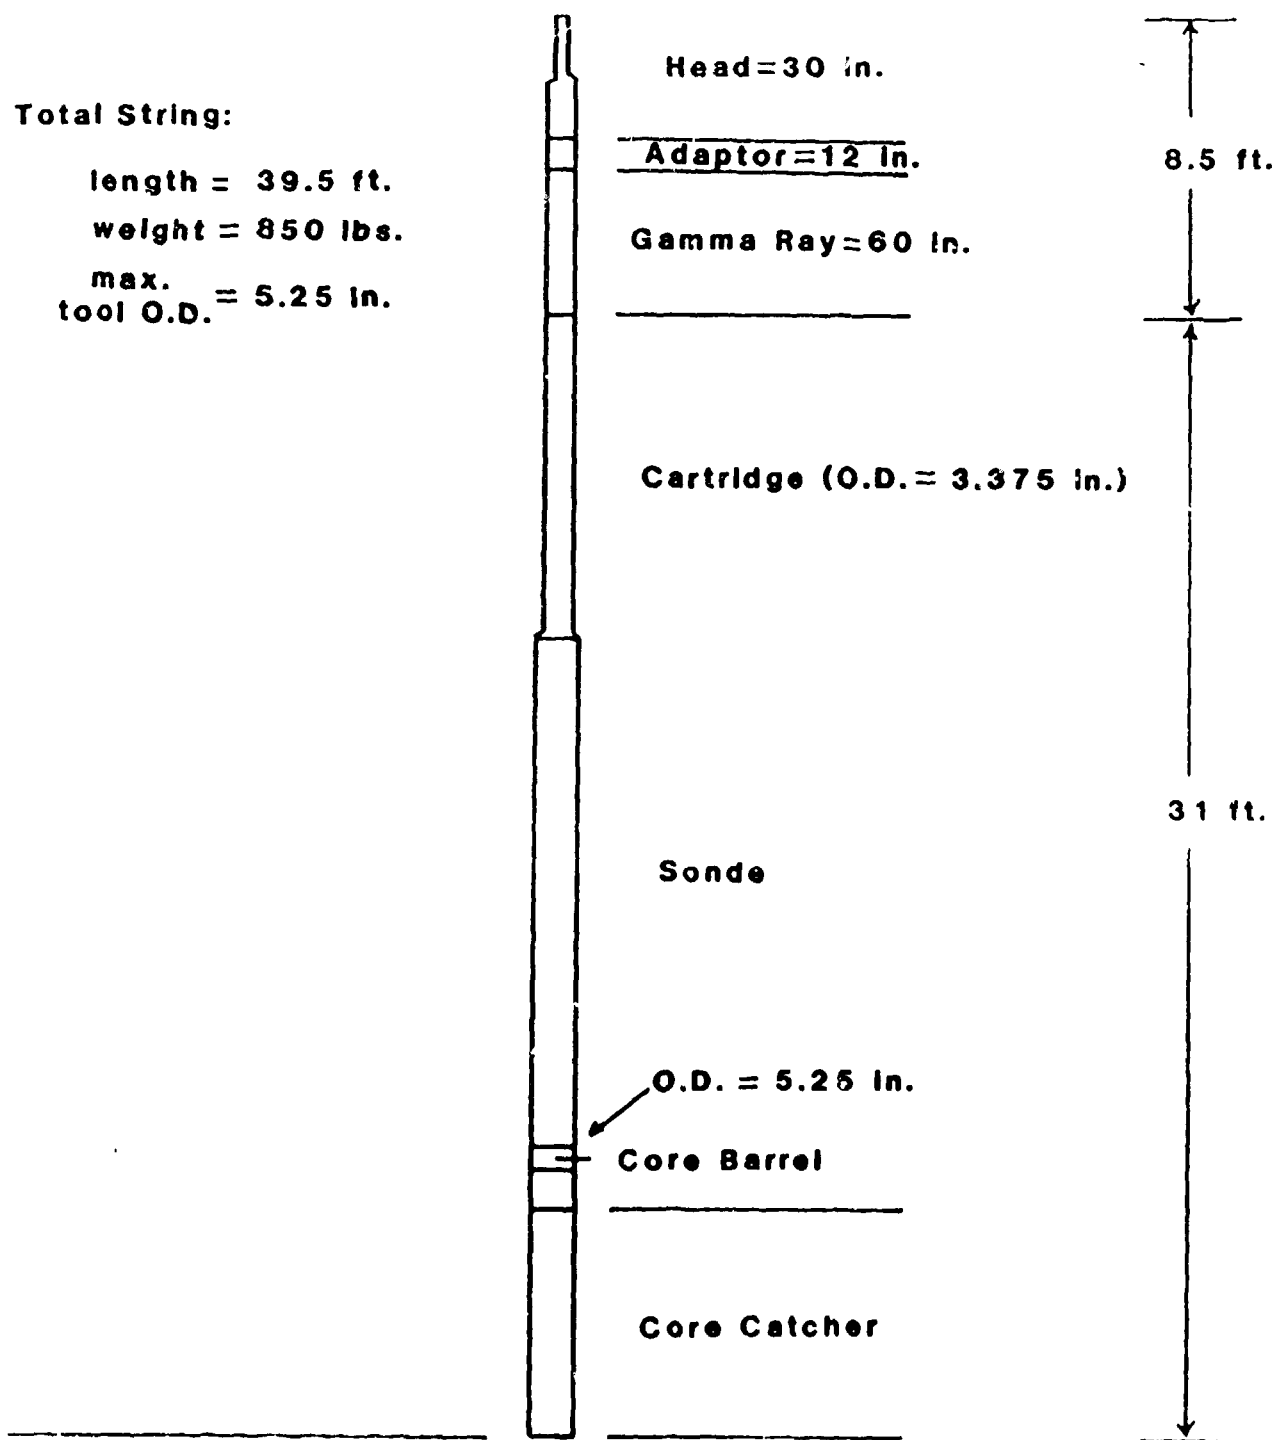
Schlumberger Sidewall Coredriller (as tested)
